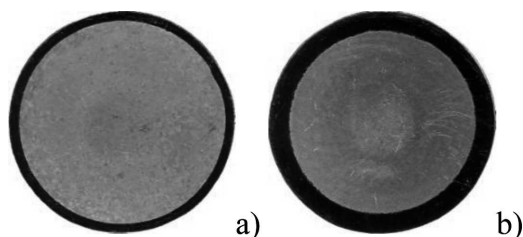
View of the examples Al-Cu bimetallic bars after explosive welding: a) 15% Cu, (sample no. 1), b) 30% Cu, (sample no. 9), [11, 12]
